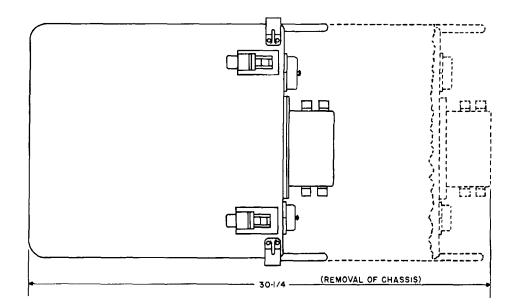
Radar Receiver-Transmitter RT-500/TPS-25, Dimensional Drawing.
